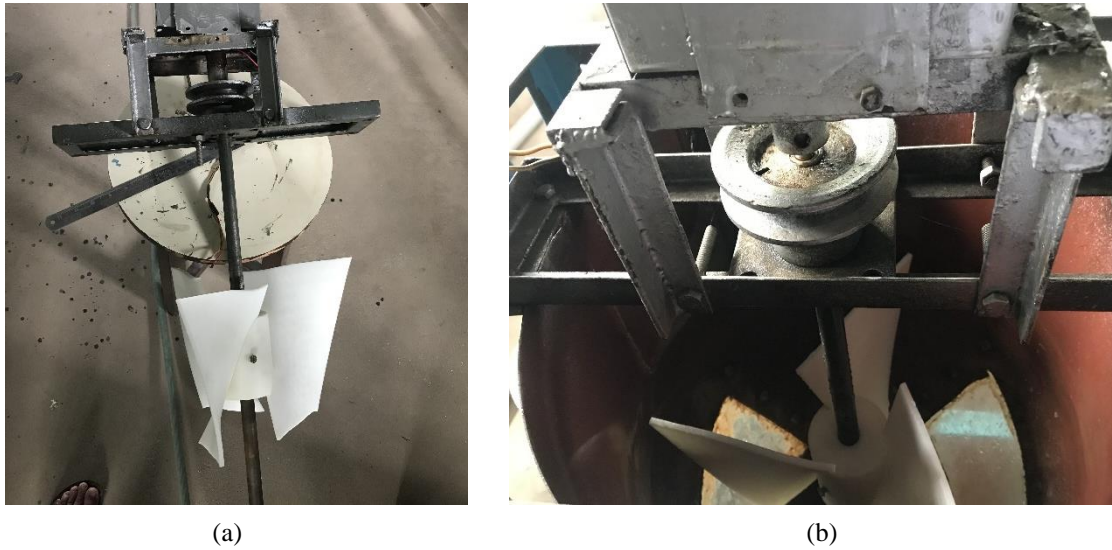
(a) Attachment of fabricated runner in shaft (b) Placement of attached runner and shaft inside test rig basin
